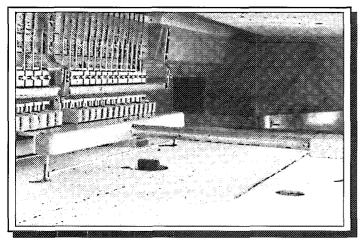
Using a damper lever setting jig to check and fineadjust damper lever height.
